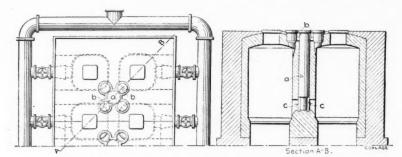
Plan and Sectional Elevation of "Ring" Producer
